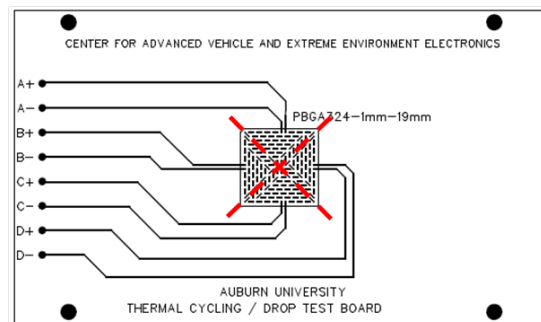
Test board showing unique 4 quadrants continuity design for PBGA324 package
